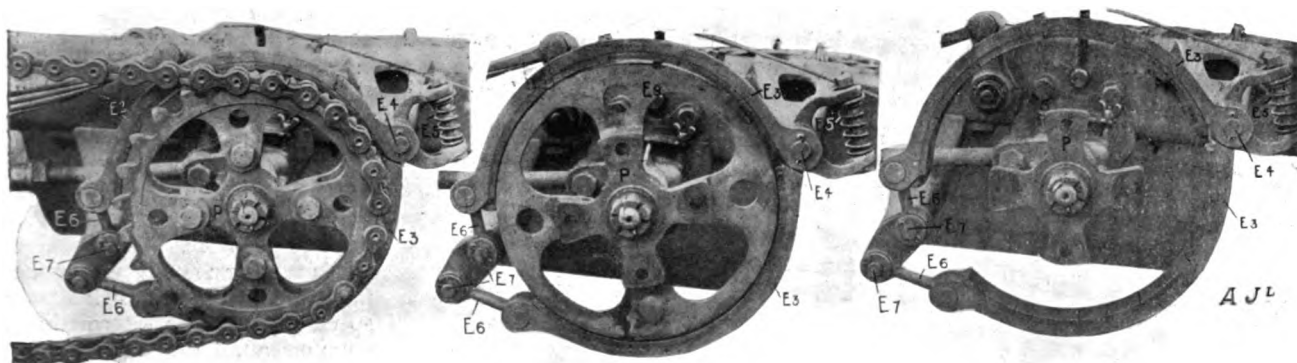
Three Views of the Countershaft Brake on the Brotherhood Car, showing—in addition to the Construction of the Brake—the method adopted for enabling the Sprocket and the Brake-Drum to be removed without disturbing the Brake-Shoes.
